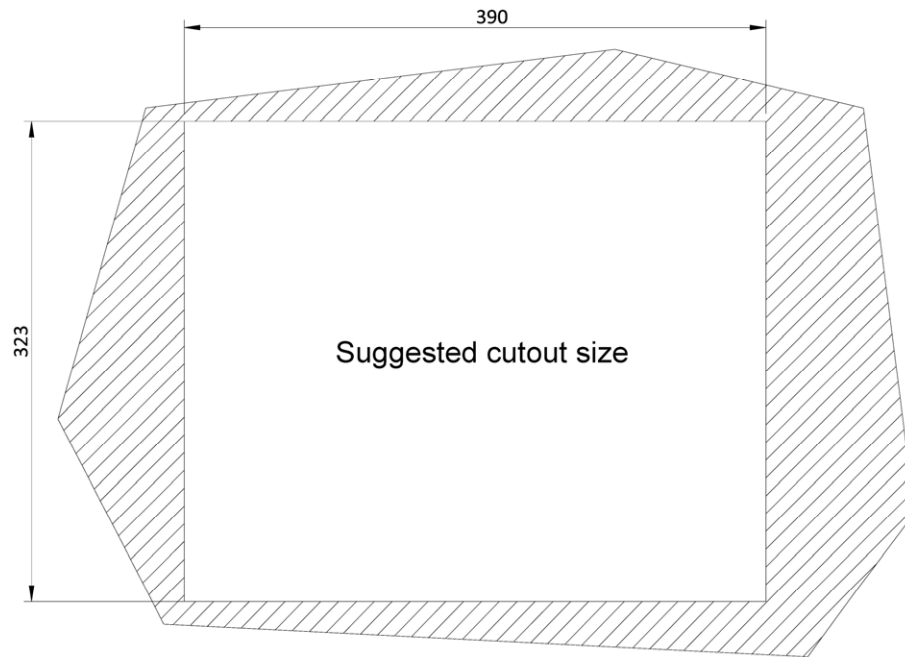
PPC-F17A-H81 Panel Cutout Dimensions
